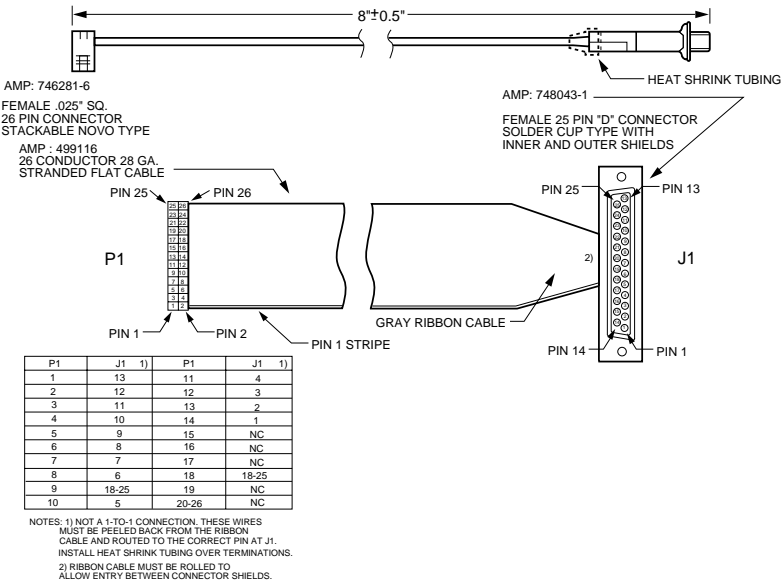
ZT 90156 Revision 0 Printer Interface Cable.
